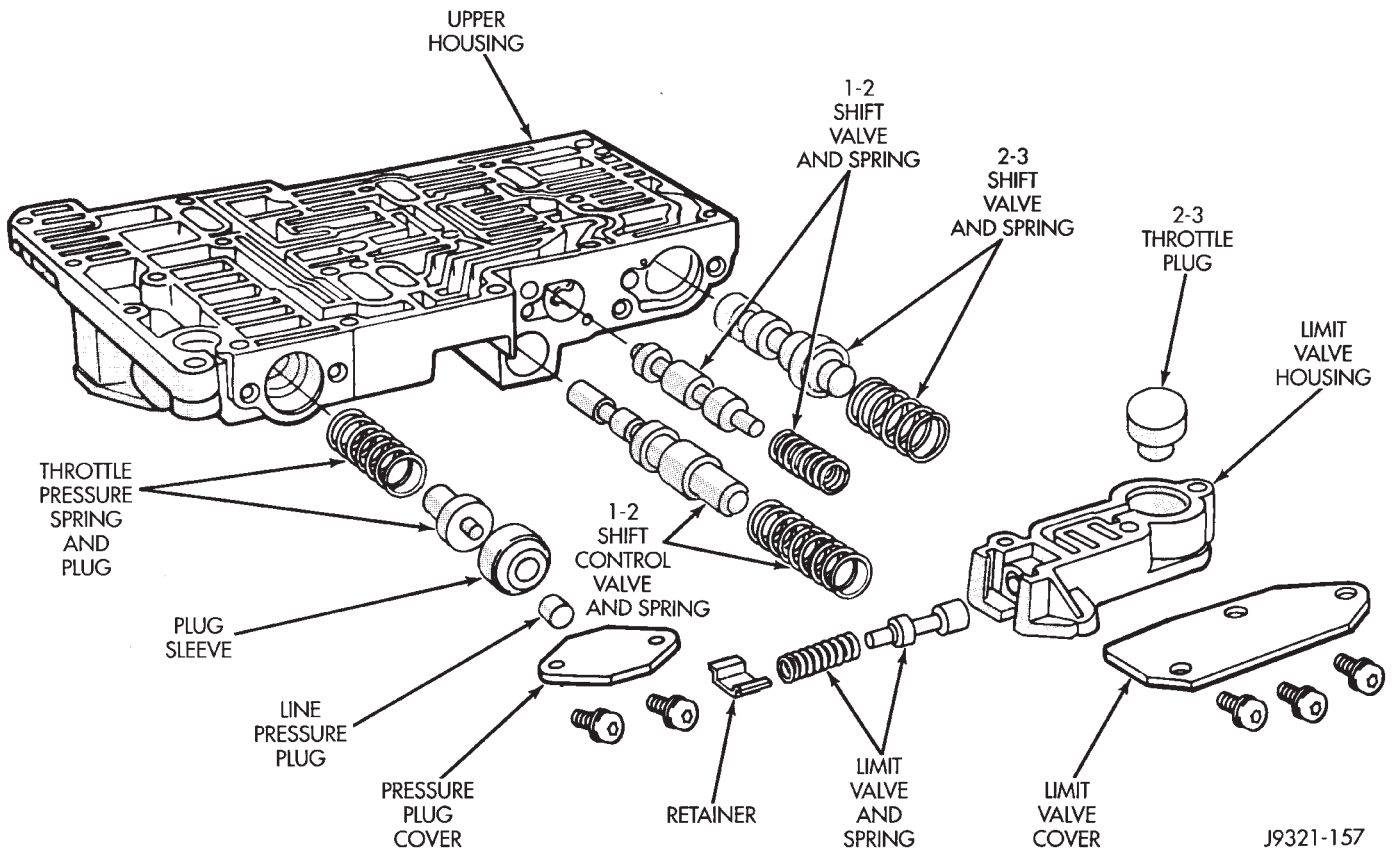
Upper Housing Shift Valve And Pressure Plug Locations
